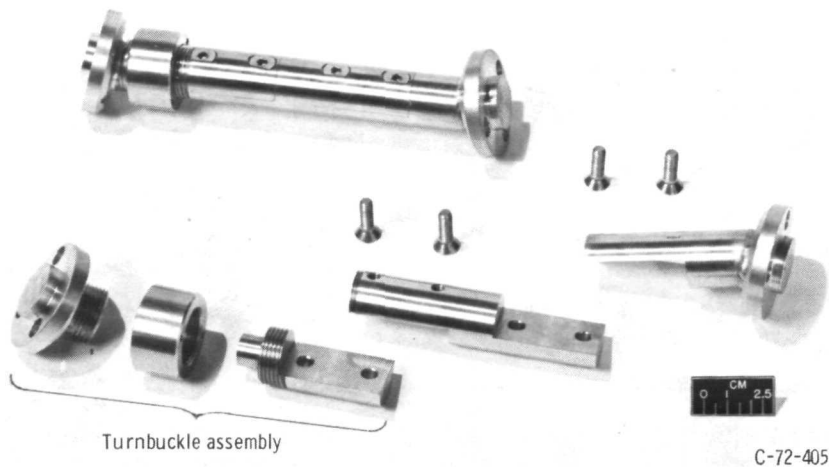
Spacer bar used to support compressive forces between individual coils. A spacer bar like that shown was located on inner side of each coil pair. The threaded nut at one end of the spacer bar is a turnbuckle arrangement for adjustment of spacing between coils.
